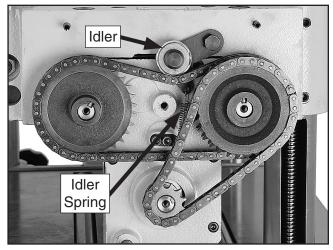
Location of sprocket and chain components (hex bolts and washers removed).
